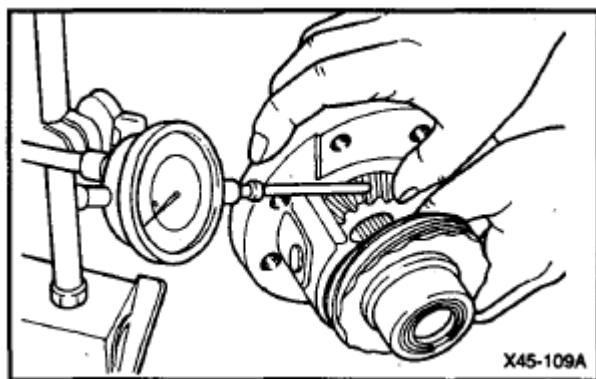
Measuring Backlash Between Side Gear & Pinion Gear
